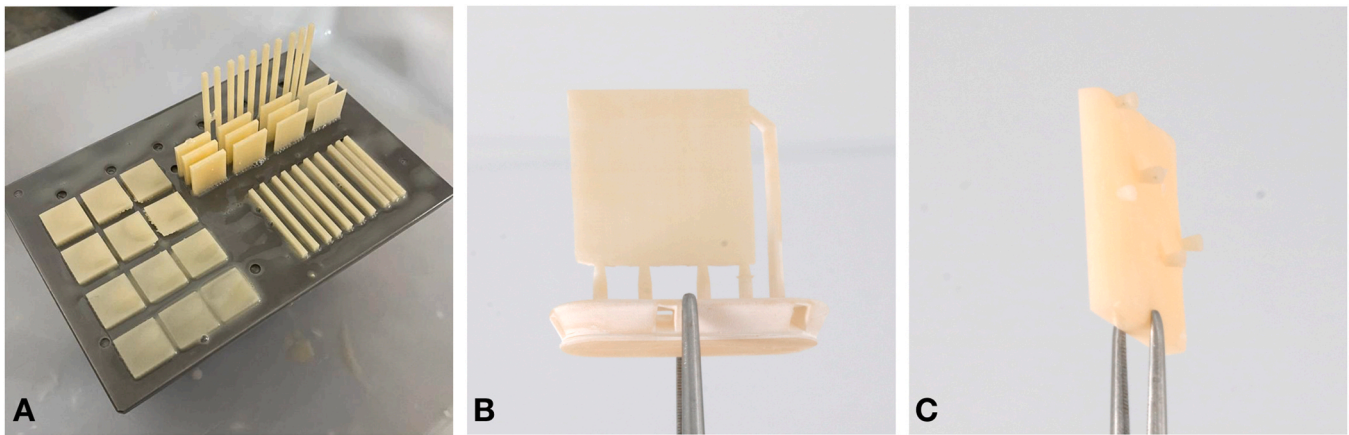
A: 0° and 90° specimens printed using Asiga Max UV printer. B: 90° specimens printed using Formlabs 3D Form 3B+. C: 0° specimens printed using Formlabs 3D Form 3B+.
